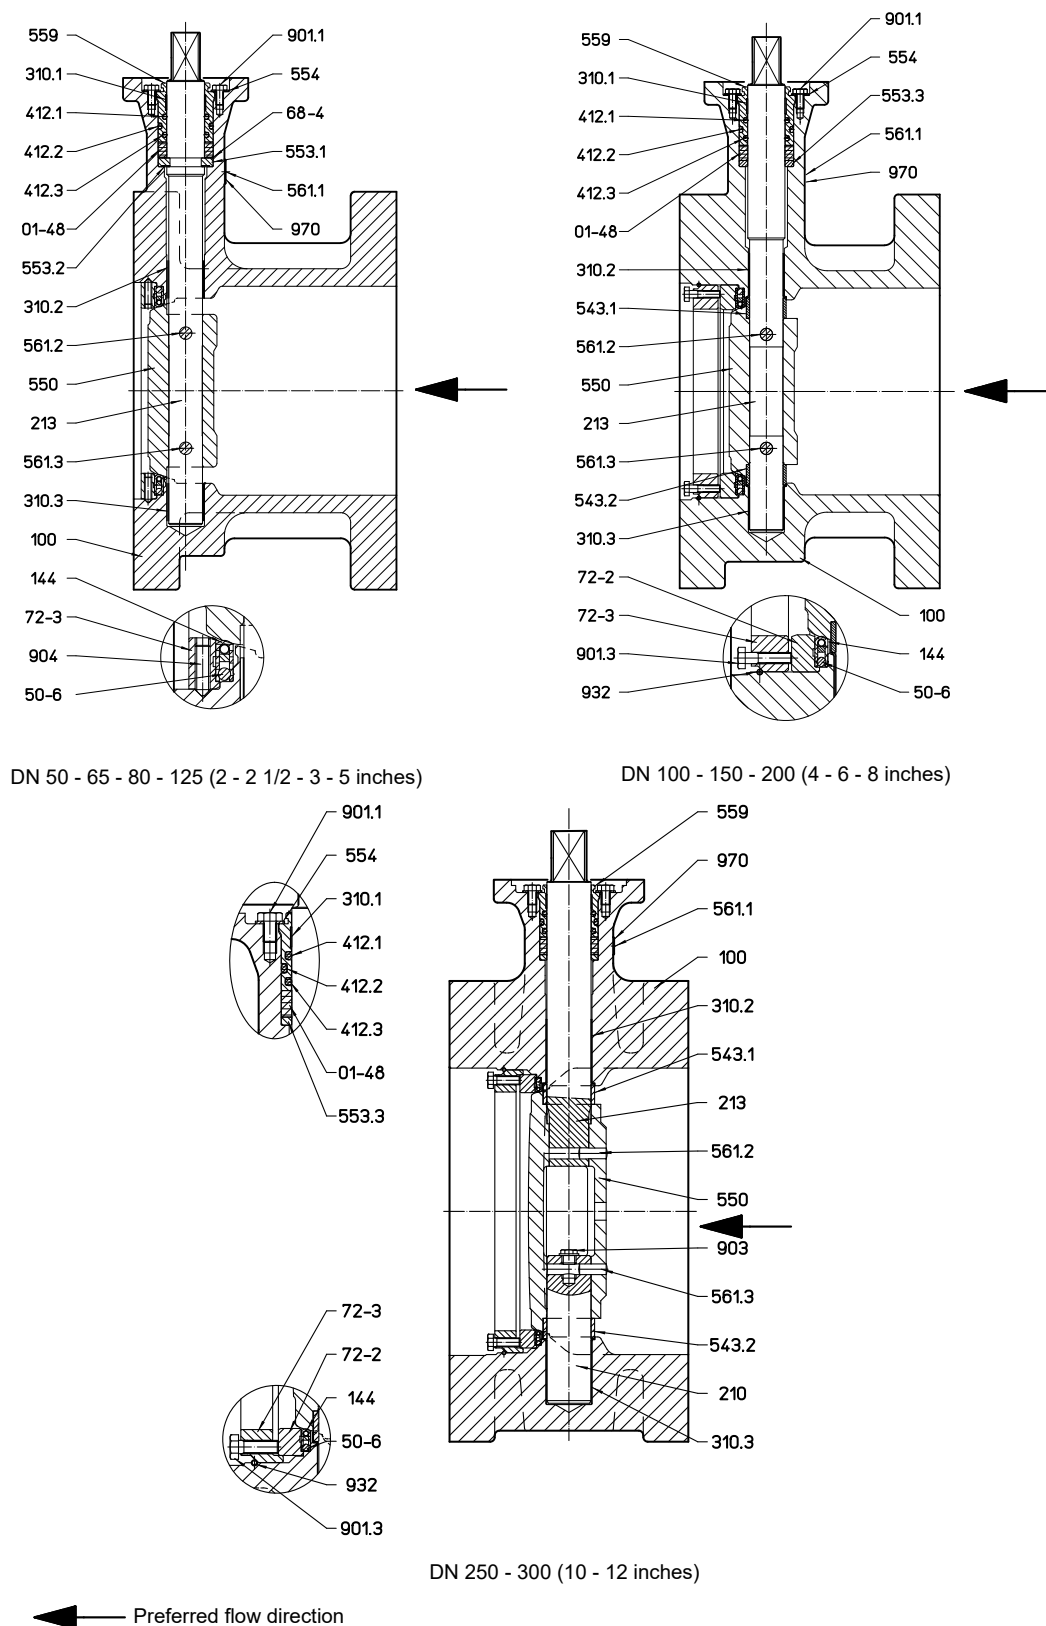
Sectional drawing of DANAIS MT II DN 50 - 300 (2 - 12 inches) / flanged body (T7) / plastomer design
